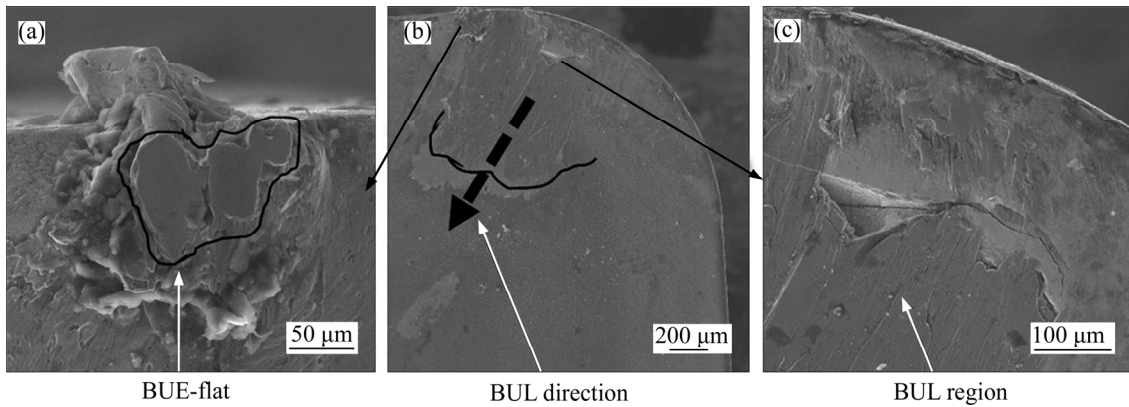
SEM image of BUL formation on tool rake face: (a) Enlarged image of BUE; (b) Tool rake face; (c) Enlarged image of BUL and fracture
